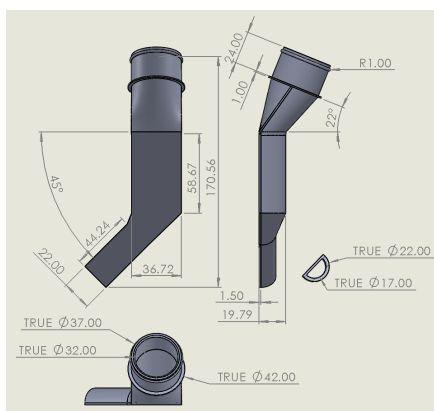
The SolidWorks design drawings for the 17 mm nozzle at angles 45°/135° with dimensions in mm.
